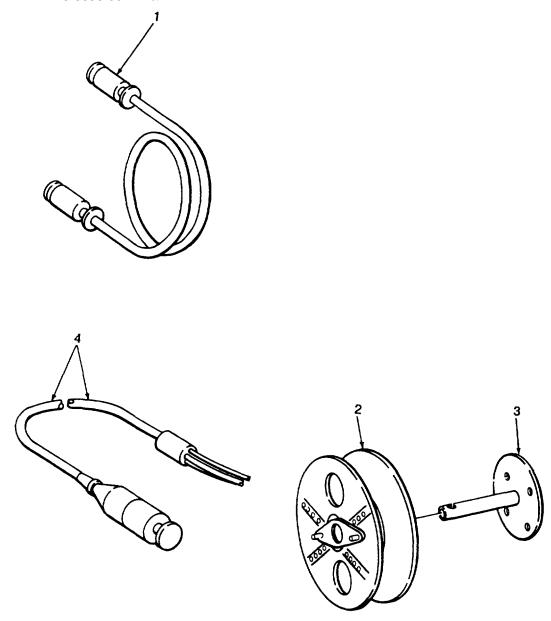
POWER CABLE ASSEMBLY AND POWER CABLE ADAPTER
